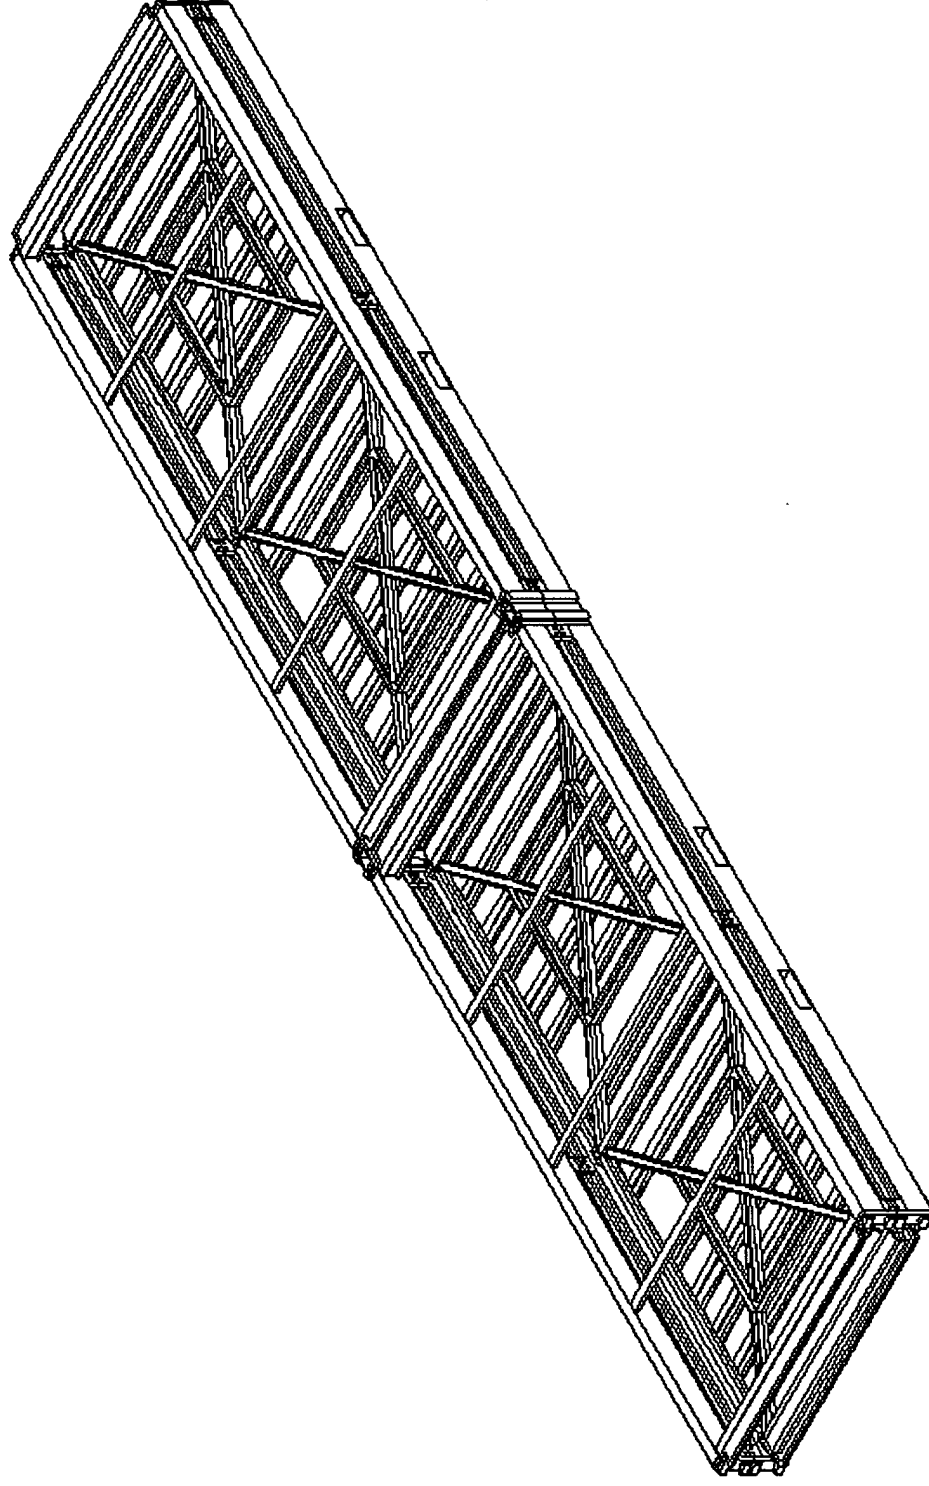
C: Isometric view of connected ceiling frames stacked on top of connected floor frames. Each connected floor frame contains two front frames and two back frames (20 foot collapsible cargo container). This assembly is now referred as “collapsible cargo container frame panel assembly”.
